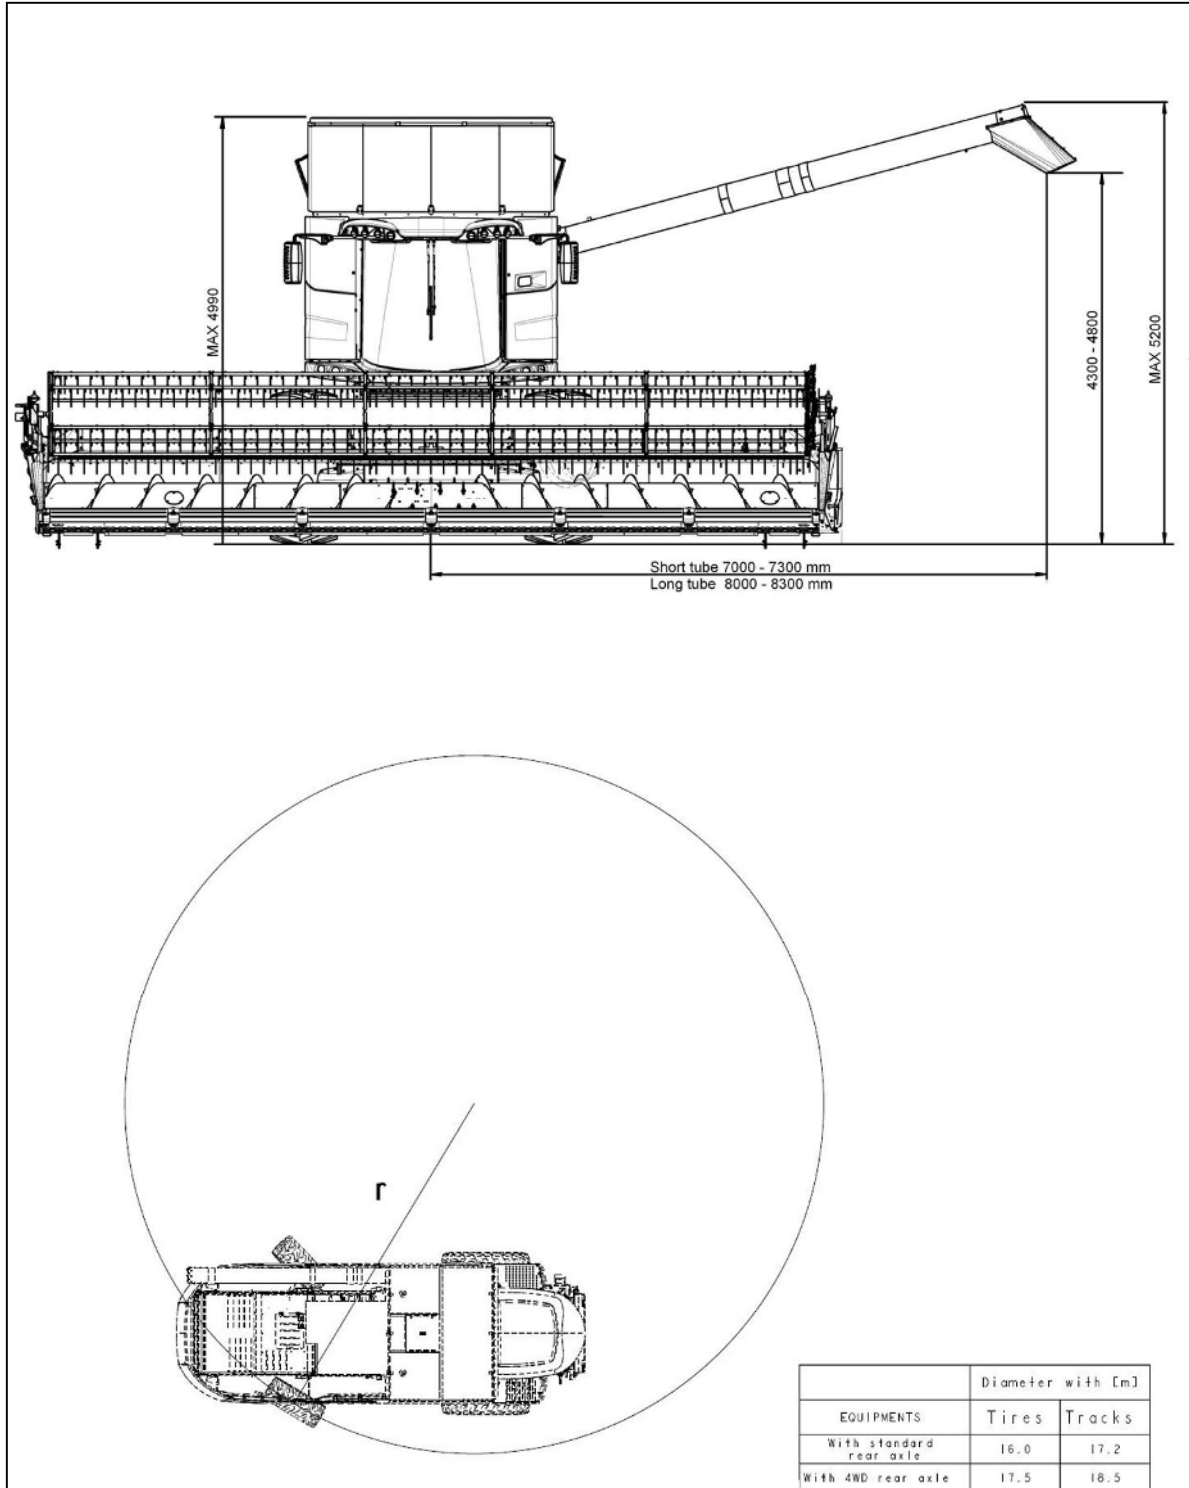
Dimensions with cutting table and active unloading tube; dimensions of turning radius
